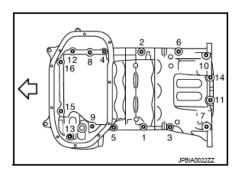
Oil Pan Mounting Bolts Tightening Sequence Courtesy of NISSAN MOTOR CO., U.S.A.
